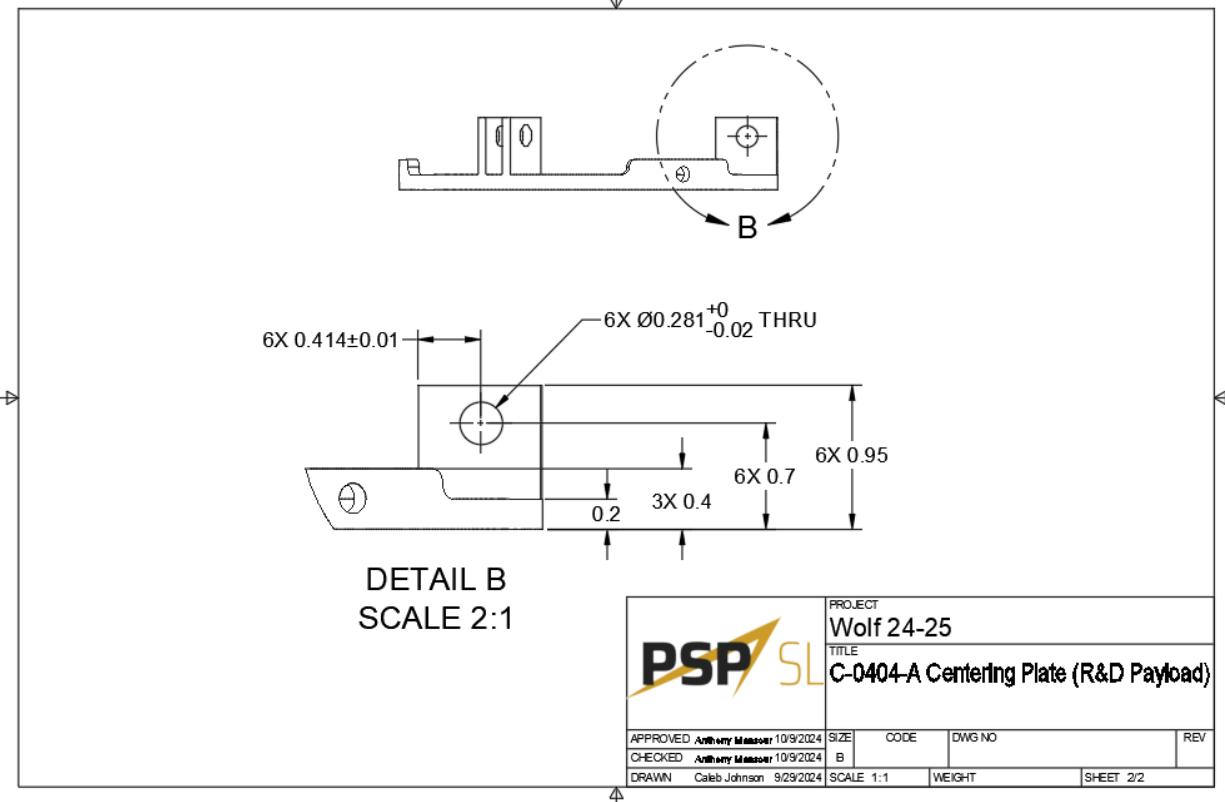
Centering Plate Technical Drawing (Sheet 2)
